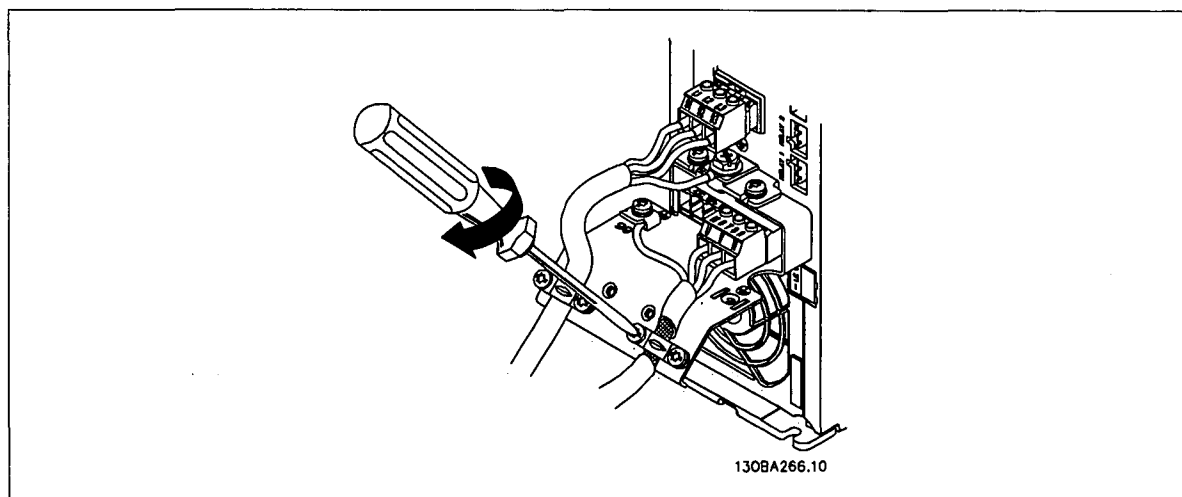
Mount cable clamp to ensure 360 degree connection between chassis and screen, note the outer insulation of the motor cable is removed under the clamp.
